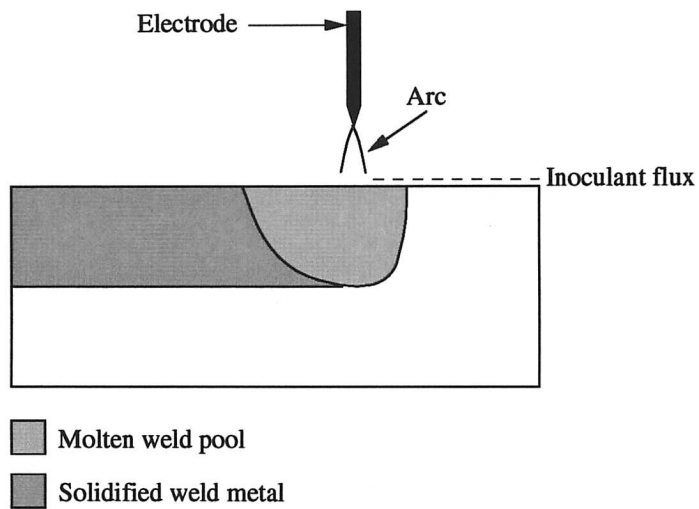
Autogenous TIG welding with inoculant flux.
